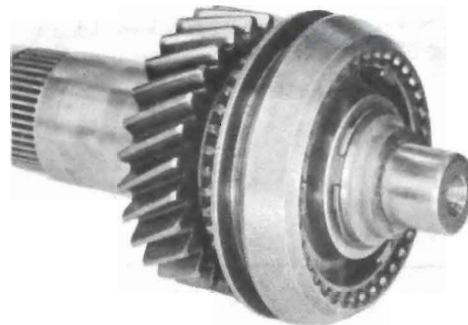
Installing Second-Third-Speed Synchronizer Assembly
